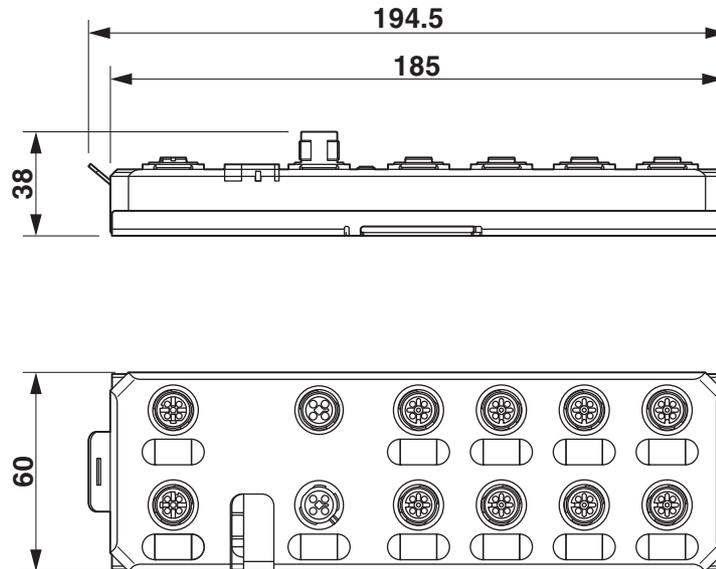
Housing dimensions (mm) of metal devices with mounting plate
